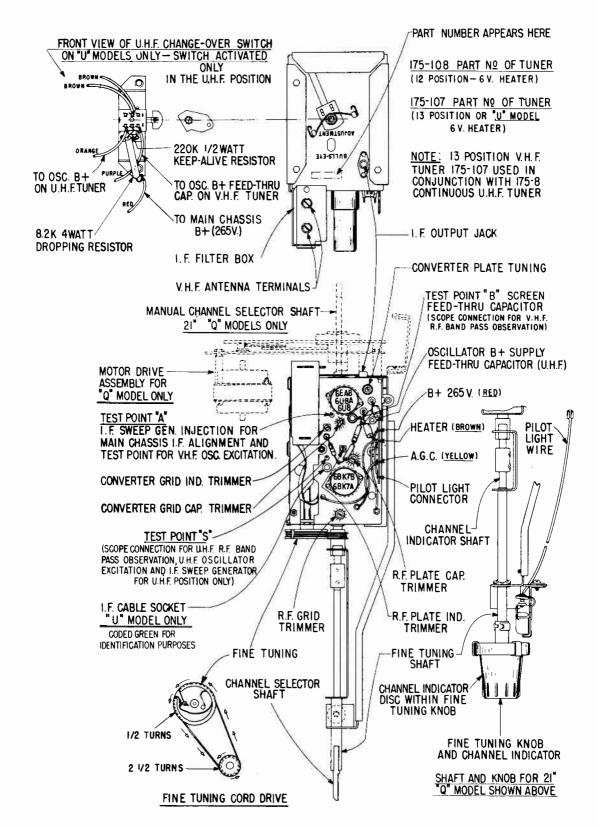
Tube and Trimmer Layout, Bull's Eye Tuner
